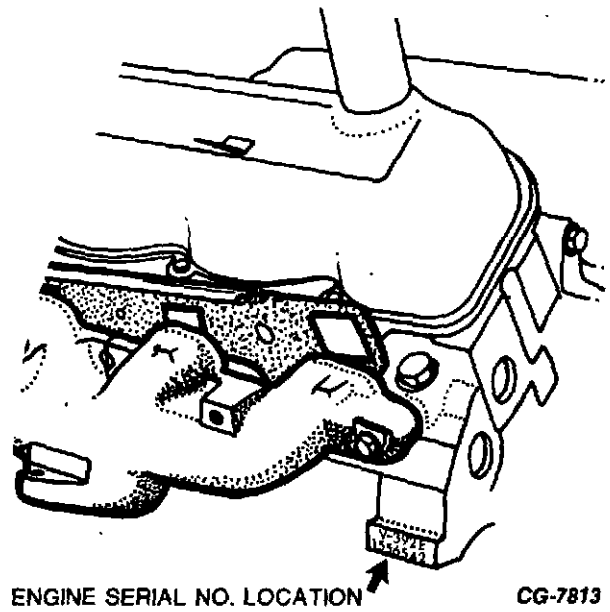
C-304, 345, 392 ENGINES ON CRANKCASE RIGHT BANK UPPER FRONT
